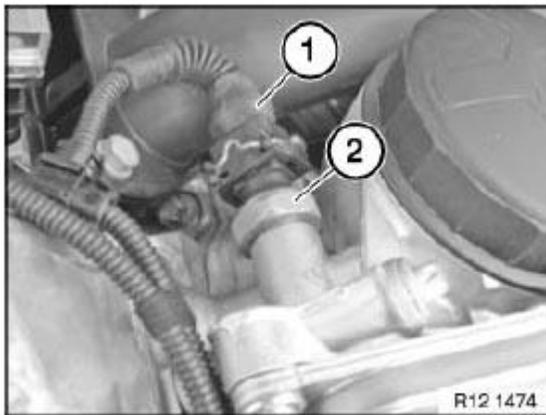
Identifying Plug Connection On Oil Pressure Switch
